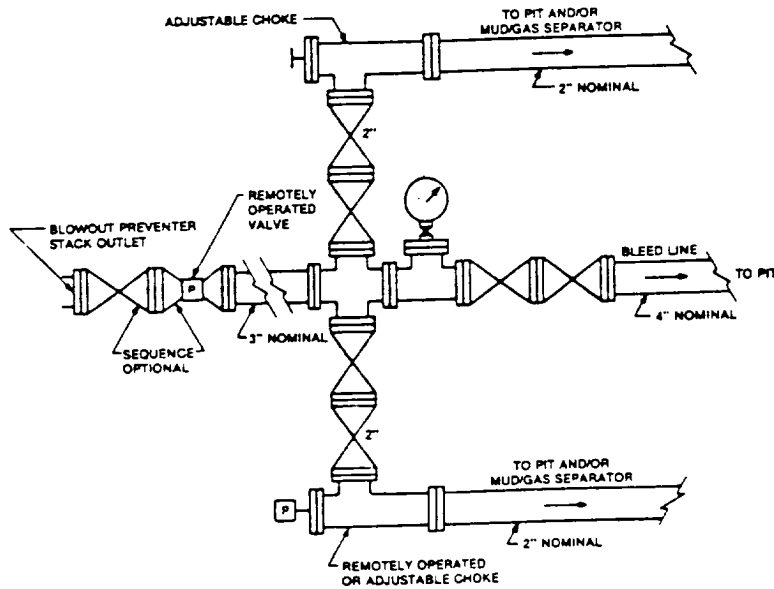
Typical choke manifold assembly for 5M rated working pressure service — surface installation.
